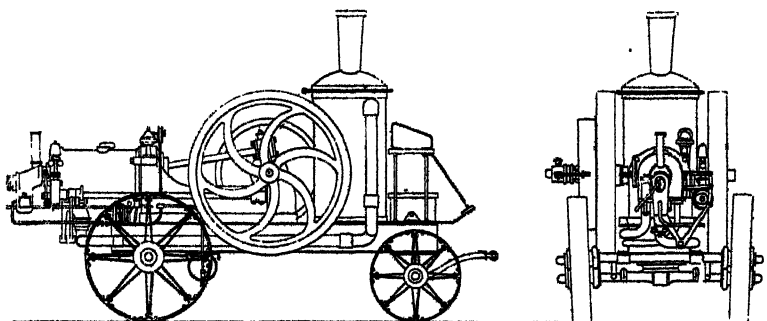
General Arrangement of the Howard Patent Portable Oil Engine.
